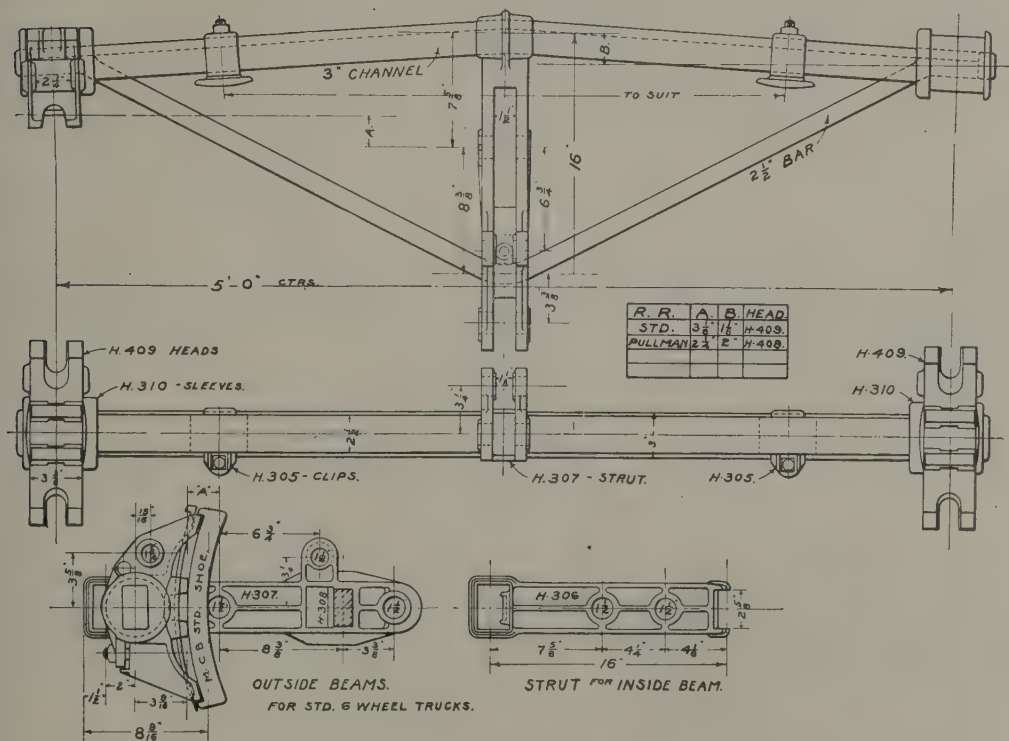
Huntoon Adjustable Head Brake Beam for Six-Wheel Passenger Car Trucks.
